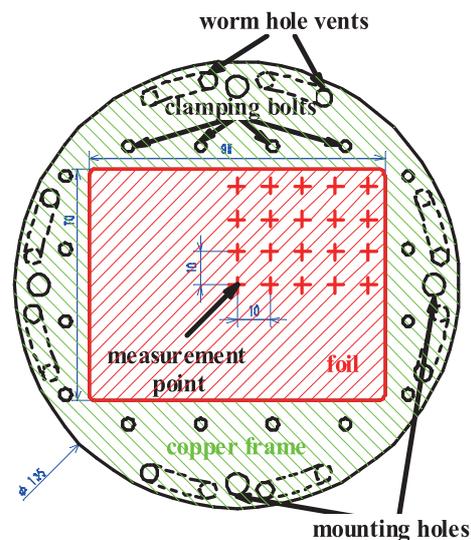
Drawing of frame and foil showing location of 20 measurement points. Dimensions are shown in mm.
